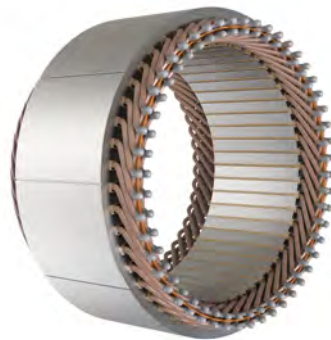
Hairpin winding 3D model with welding points in grey. Image from [31].
